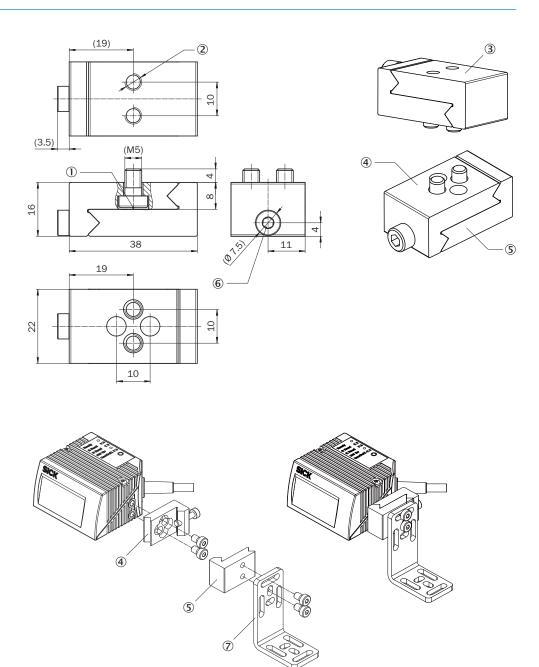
View of the quick release (dimensions in mm) and combination with mounting bracket
